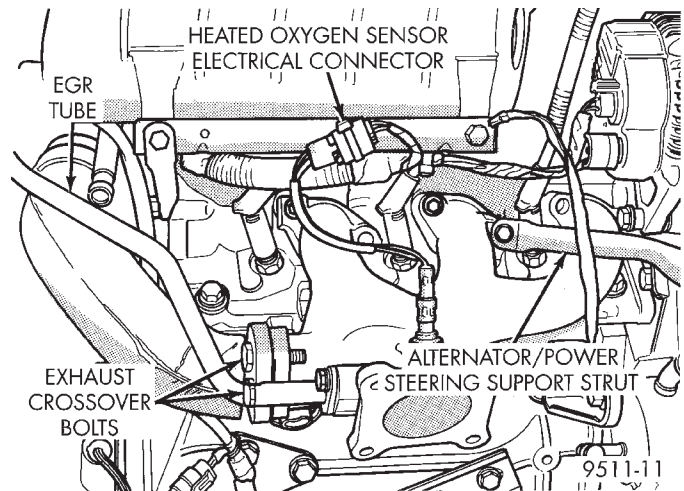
EGR Tube, Heated Oxygen Sensor and Generator/Power Steering Strut
